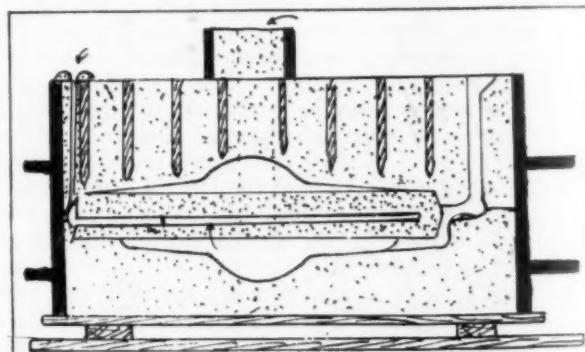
FEEDING HEAD UNDER CORE PRINT
